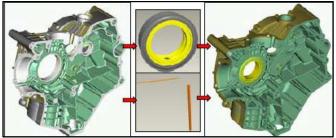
Definition of the sliding bearing crankcase numeric model starting from the rolling bearing crankcase one.
